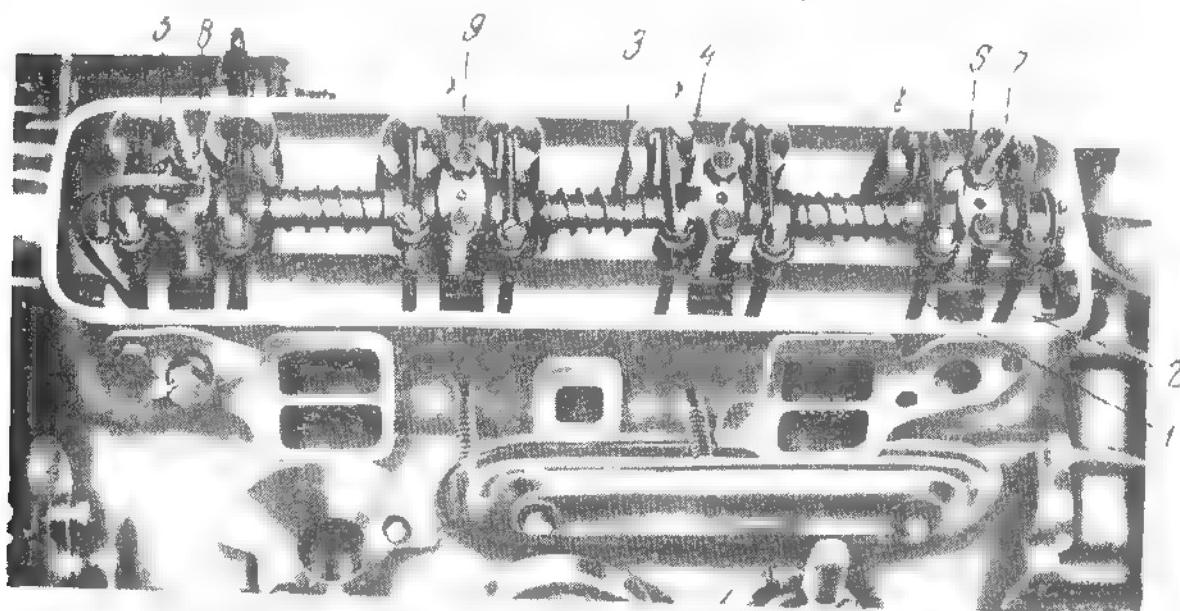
ROCKER ARM FITTED ON CYLINDER HEAD.
